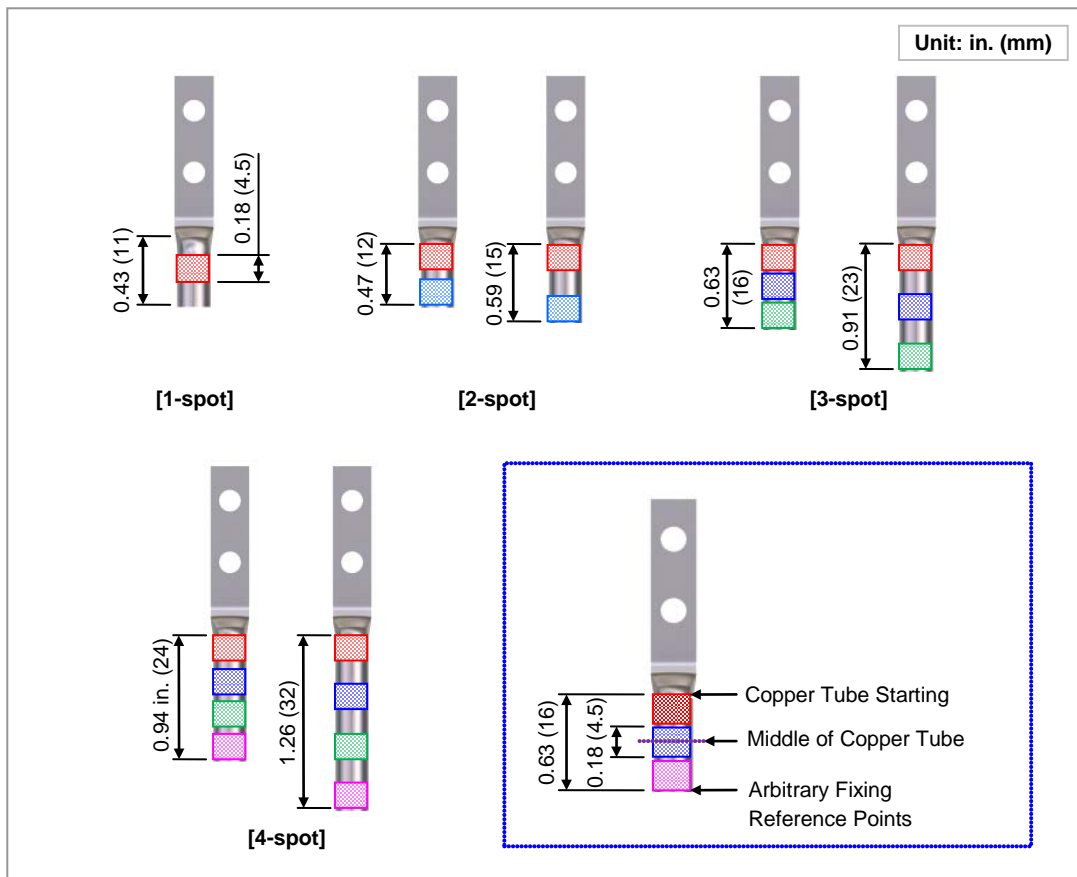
Pressure Reference Drawing (Handheld Compressor)
